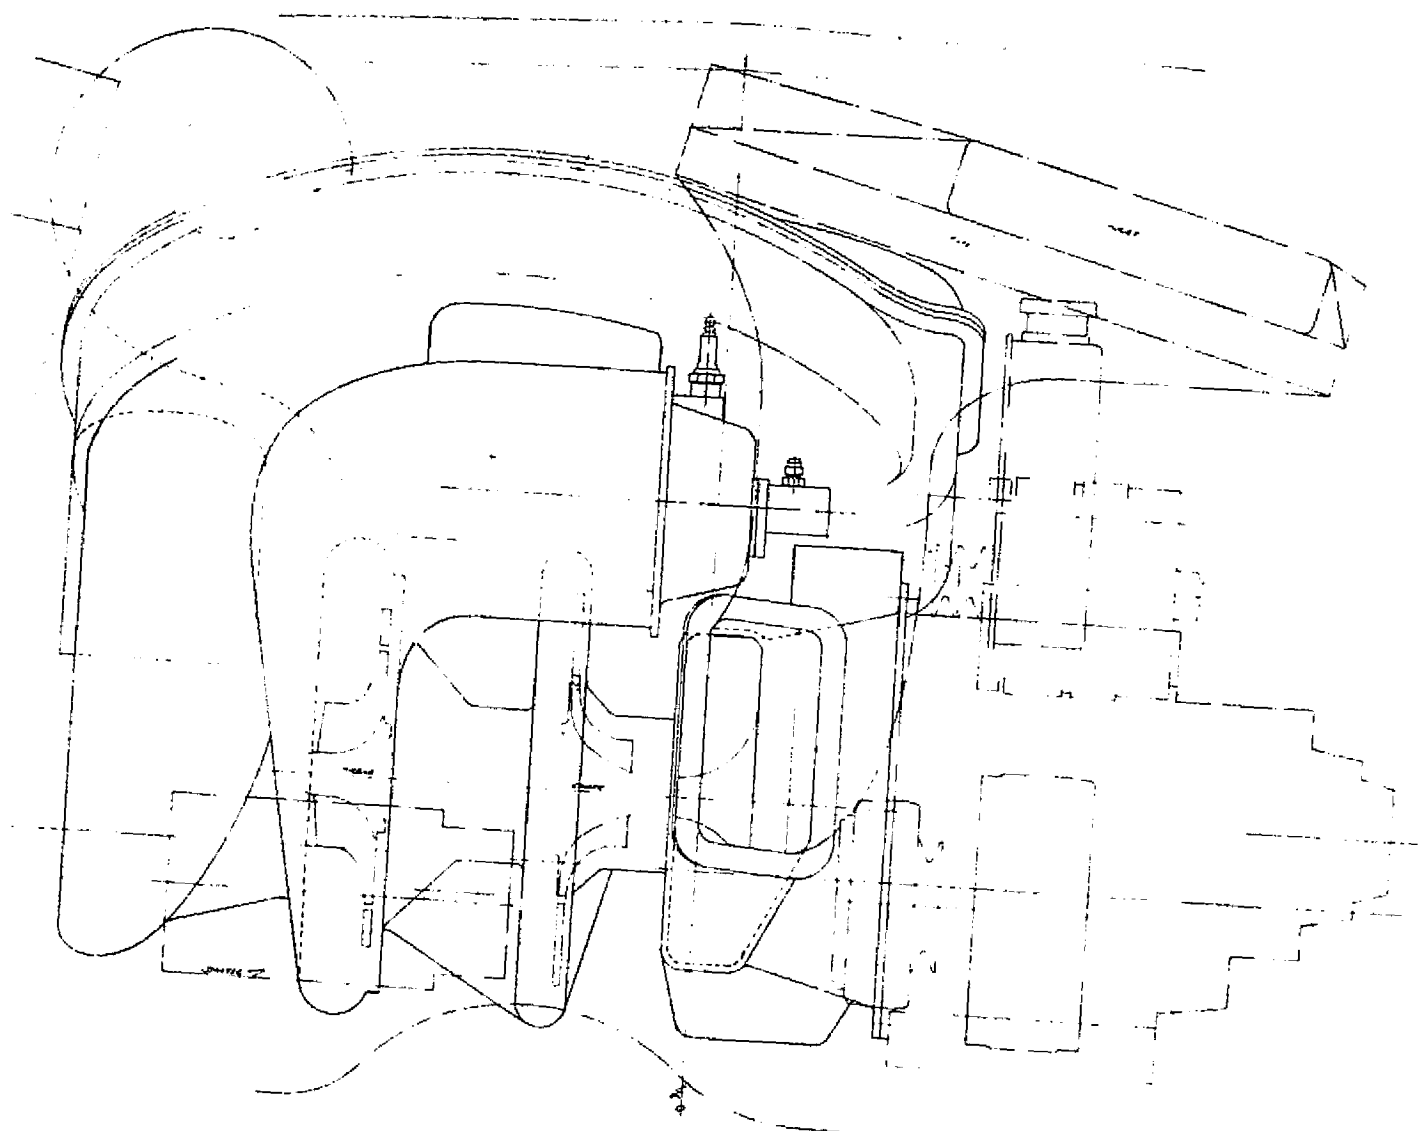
shows a single-shaft engine with one regenerator disk, an annular combustor, a two-stage axial-flow turbine, and a centrifugal compressor.
